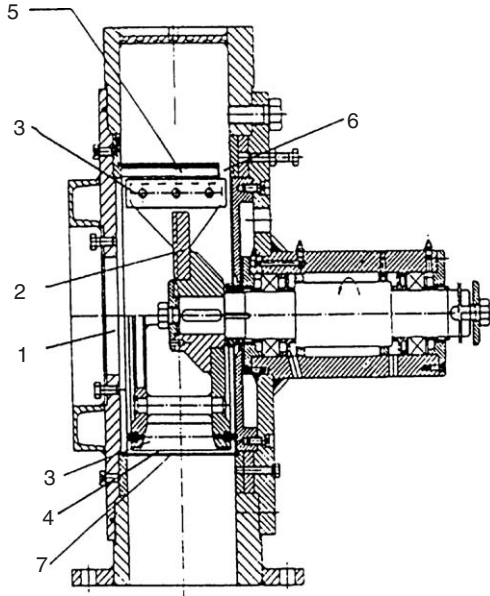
Section through a rotor impact mill with plate-shaped milling elements: 1, milling material feed; 2, rotor; 3, plate-shaped milling element (*impact beater*); 4, milling gap; 5, stator (*grinding track*) with outlet gap 6; 7, alternative stator (*screen*) with outlet through the screen perforation.
